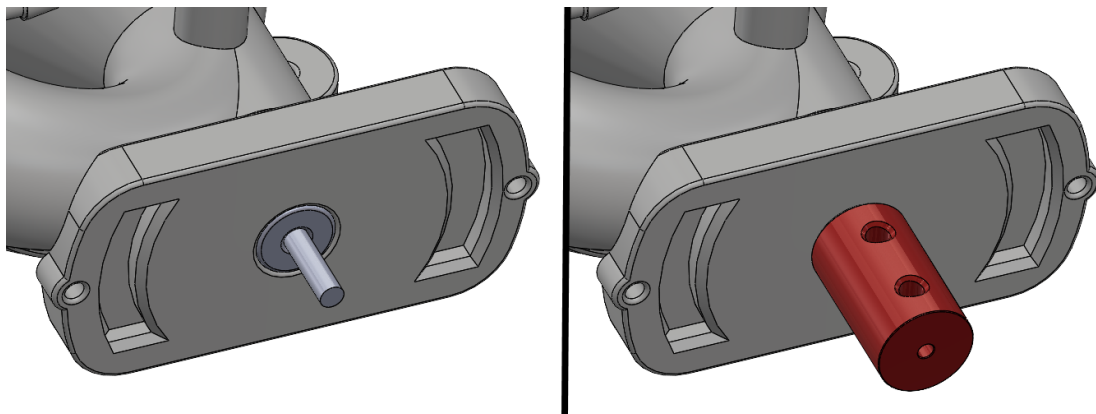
Before and after mounting the shaft coupler to the impeller shaft.
